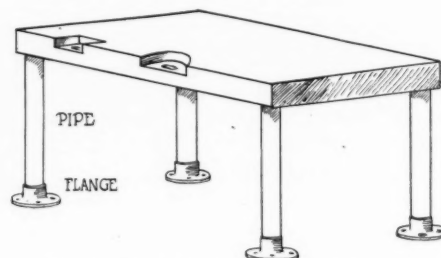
Straightening table used for supporting work. It is made of cast iron supported on legs of pipe. The indentations allow for straightening fenders, etc. The fuller is held in the square holes
